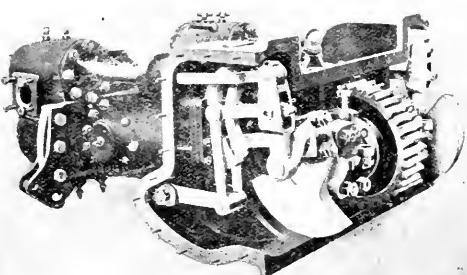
ENGINE OF GANZ MOTOR CAR WITH CASING REMOVED.
